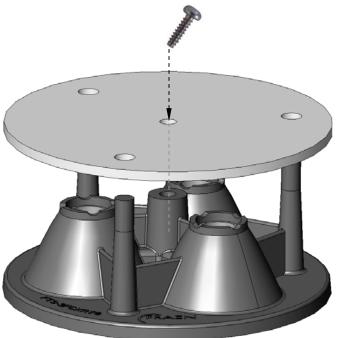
A thread-forming or thread-rolling screw (size: #4-24) can be used to secure the circuit board to the Fraen tri-lens assembly (use tri-lens assemblies with p/n suffix -HRLC). Alternatively, the 3 legs on the holder can be heat staked or glued on the back of the circuit board. For general information about heat staking, see Fraen Application Note: <a href="http://www.fraensrl.com/images/FRN">http://www.fraensrl.com/images/FRN</a> FHSLenses HeatStake.pdf
